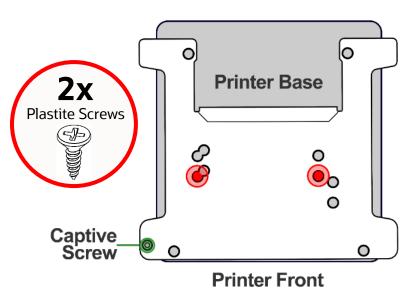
Mounting the Printer Locking Plate on the Bixolon SRP-350 PLUS V.
